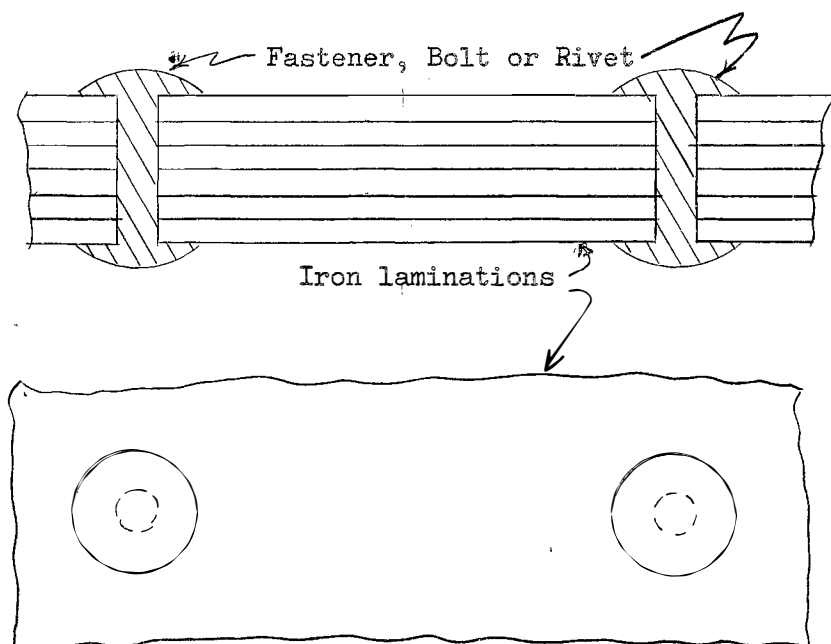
Lamination Fastener Arrangement (Bolted or Riveted)
